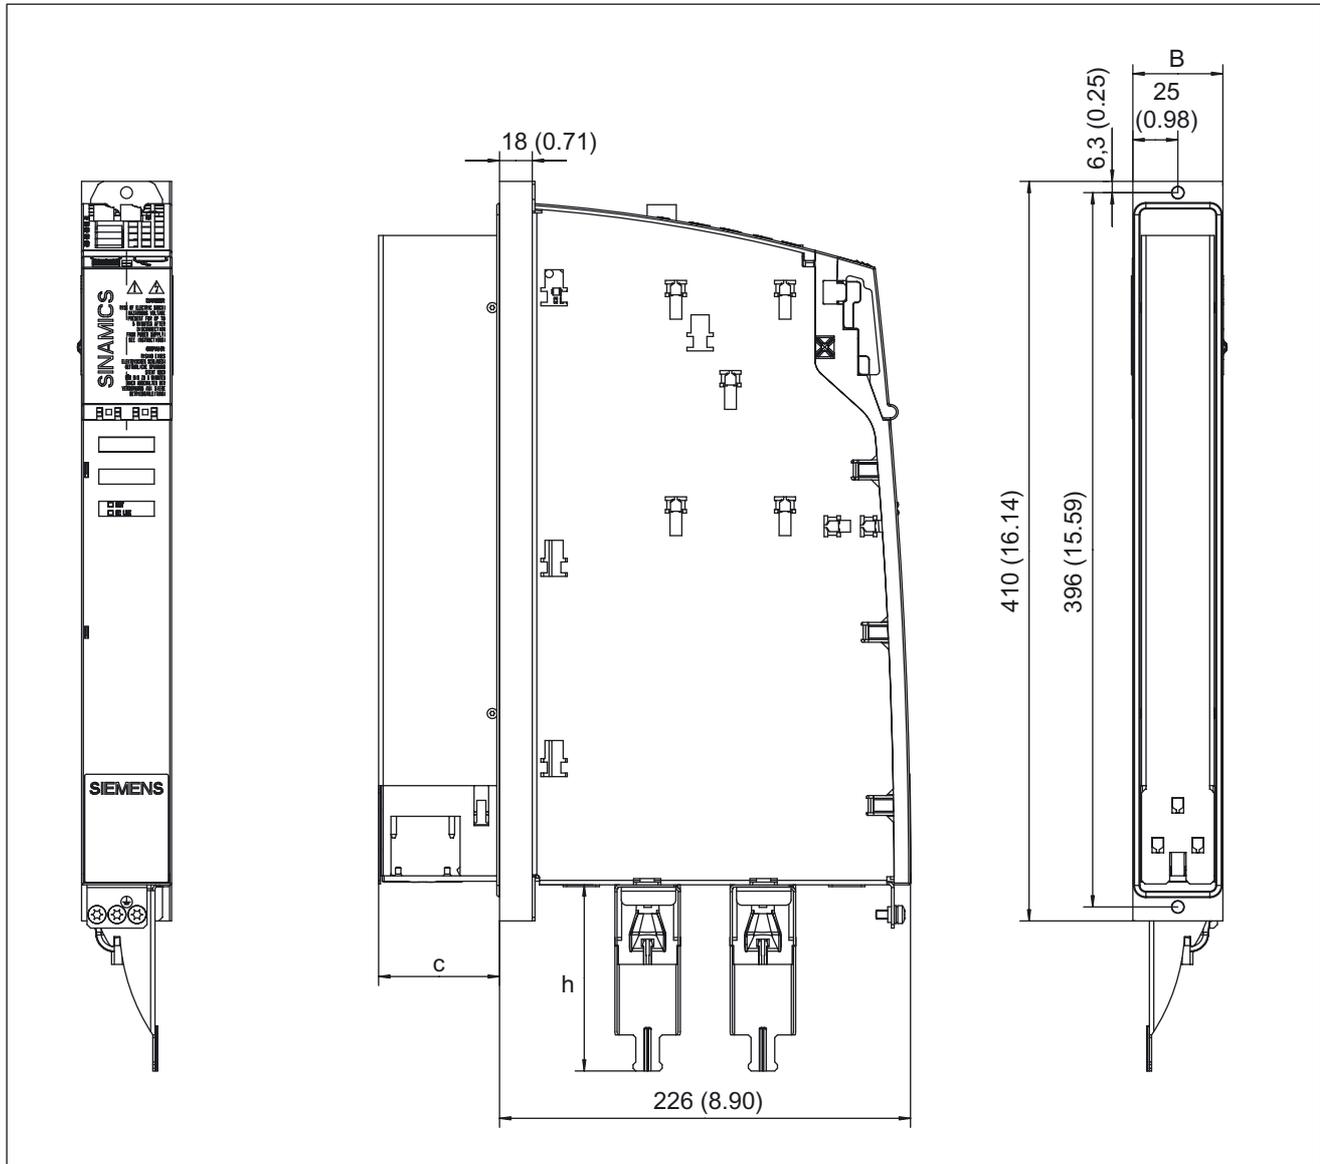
Dimension drawing of Motor Modules with external air cooling 3 A to 18 A and 2 x 3 A to 2 x 9 A, all dimensions in mm and (inches)
